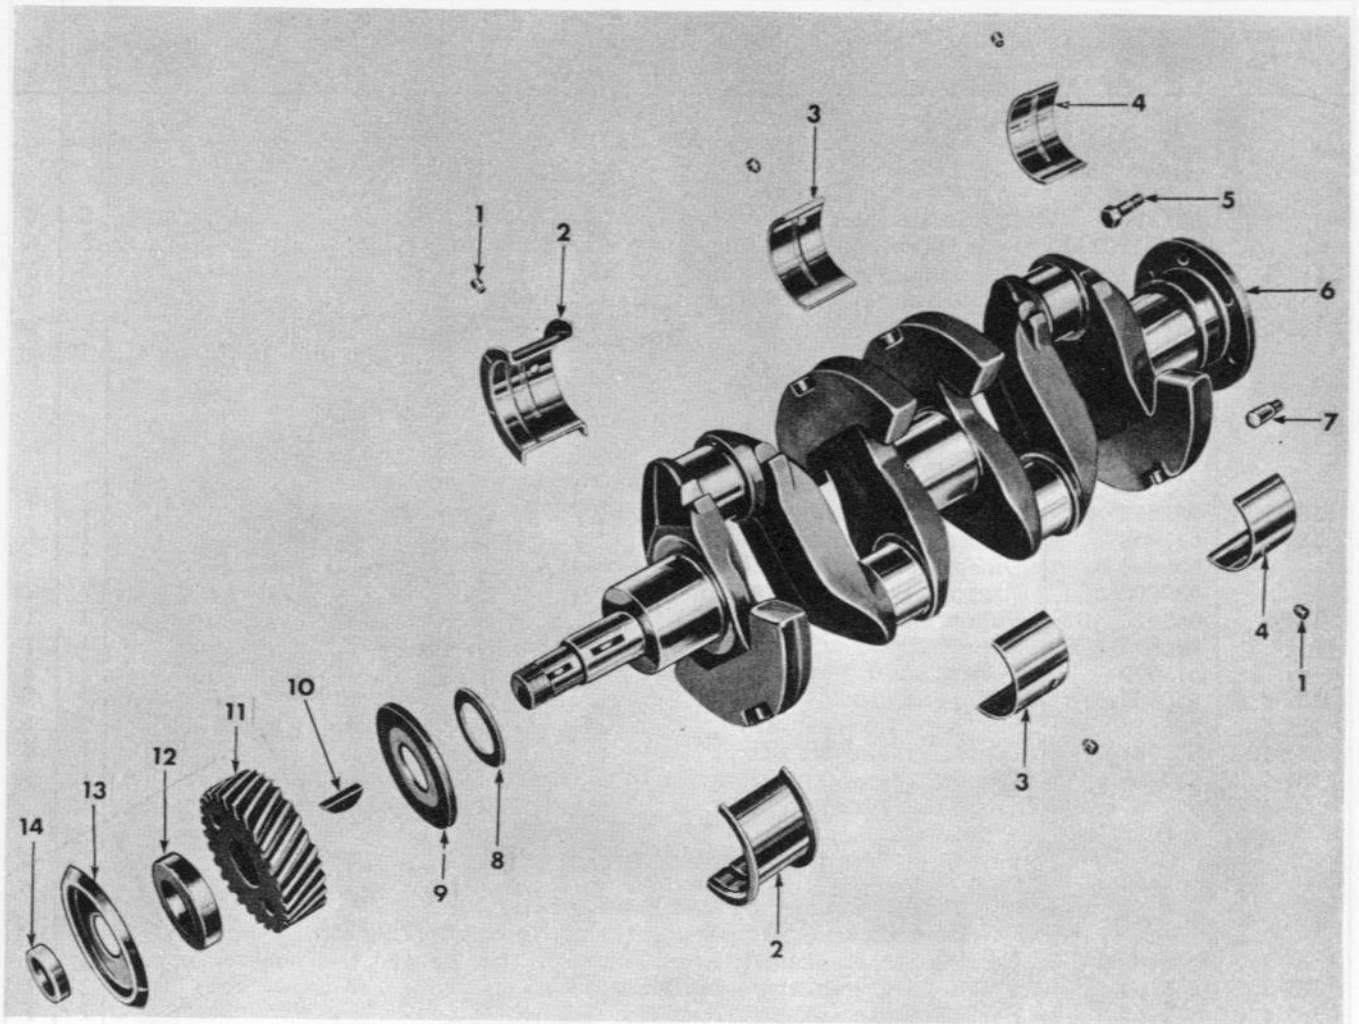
CRANKSHAFT AND BEARINGS—4L AND 4F
